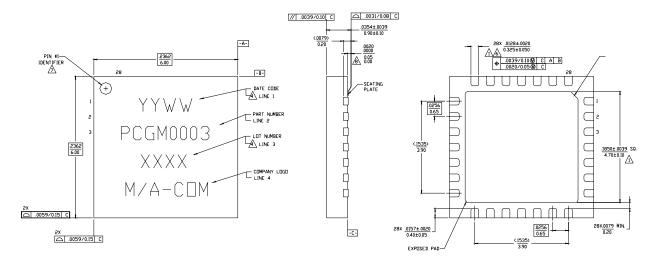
PQFN, 6mm, 28 Lead Package Drawing
